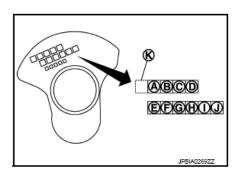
Identifying Crankshaft Pin Journal Diameter Grade On Crankshaft Courtesy of NISSAN MOTOR CO., U.S.A.
